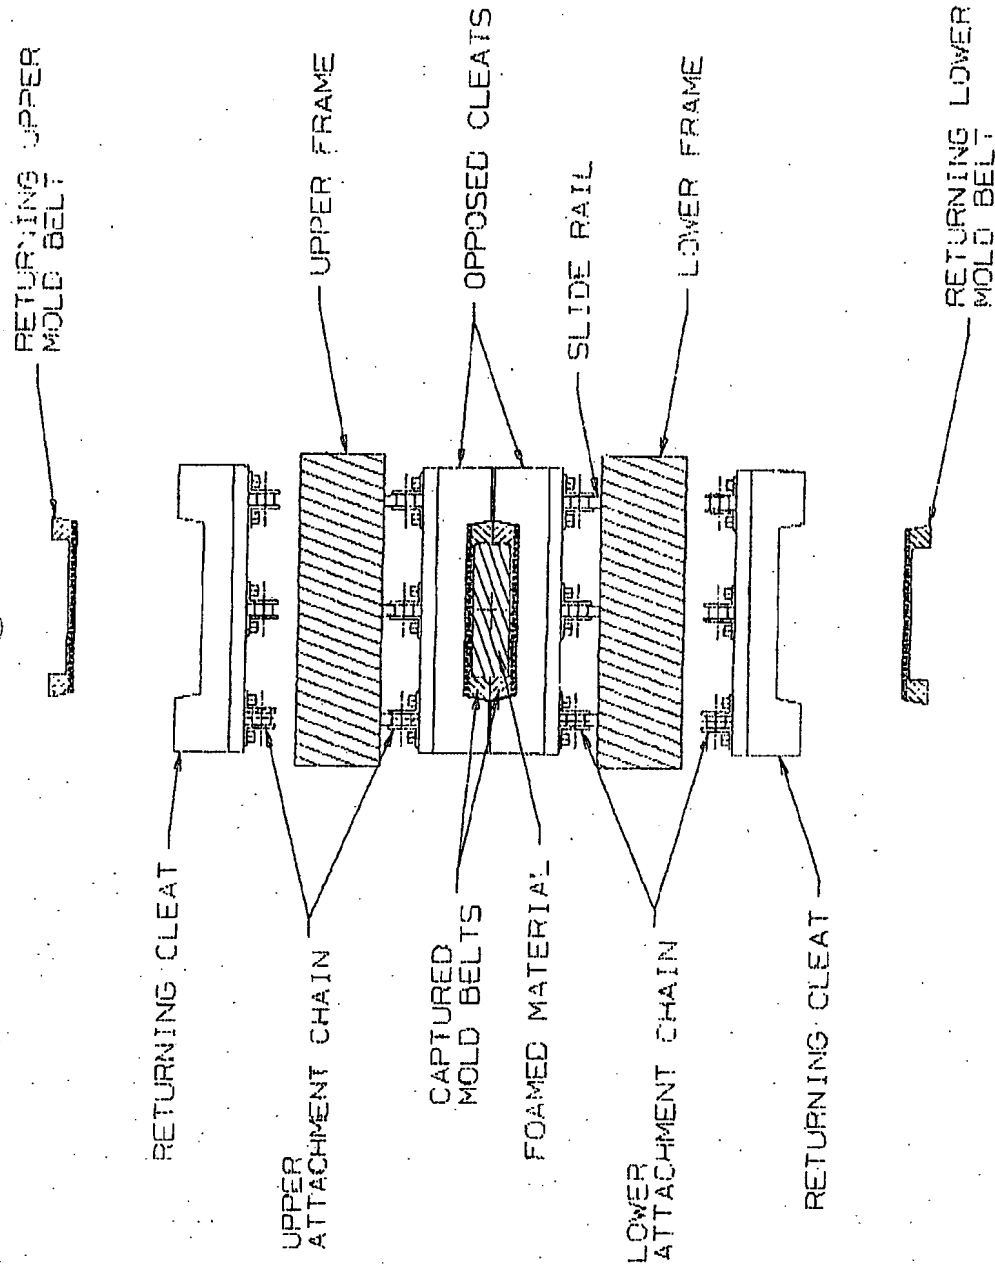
SECTION VIEW OF FORMING APPARATUS SHOWING CAPTURED MOLD BELTS WITHIN OPPOSED CLEATS.
